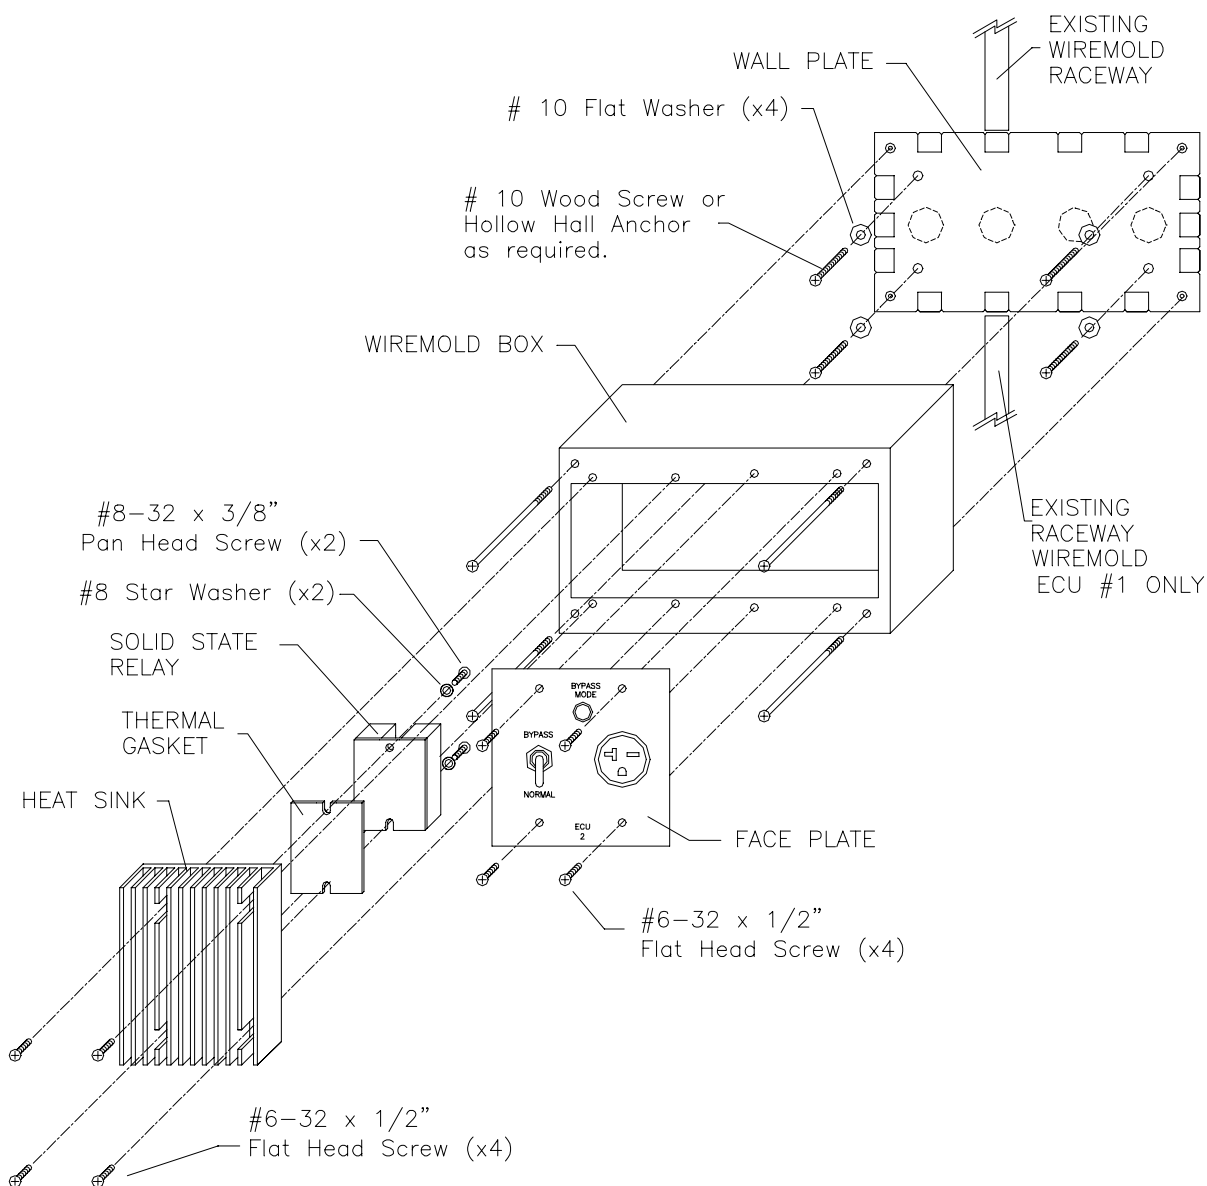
Air Conditioner Control Box Mechanical Assembly Diagram
